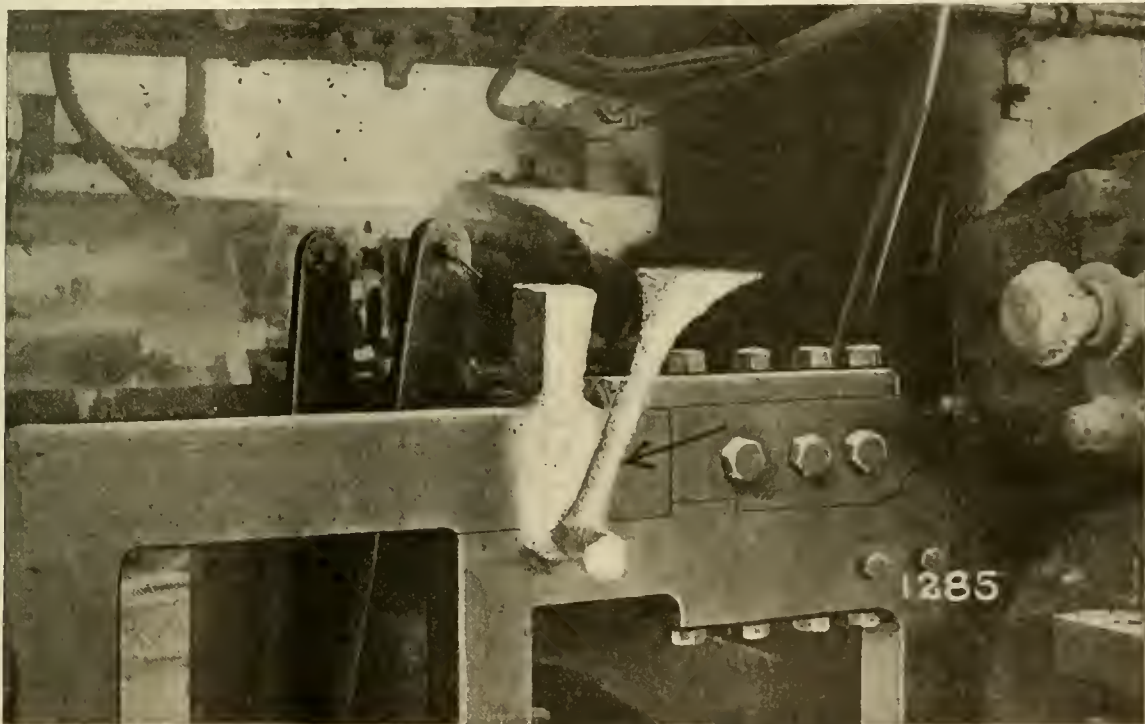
LOCOMOTIVE FRAME WELD SHOWING POURING GATE RISER AND WELD.
